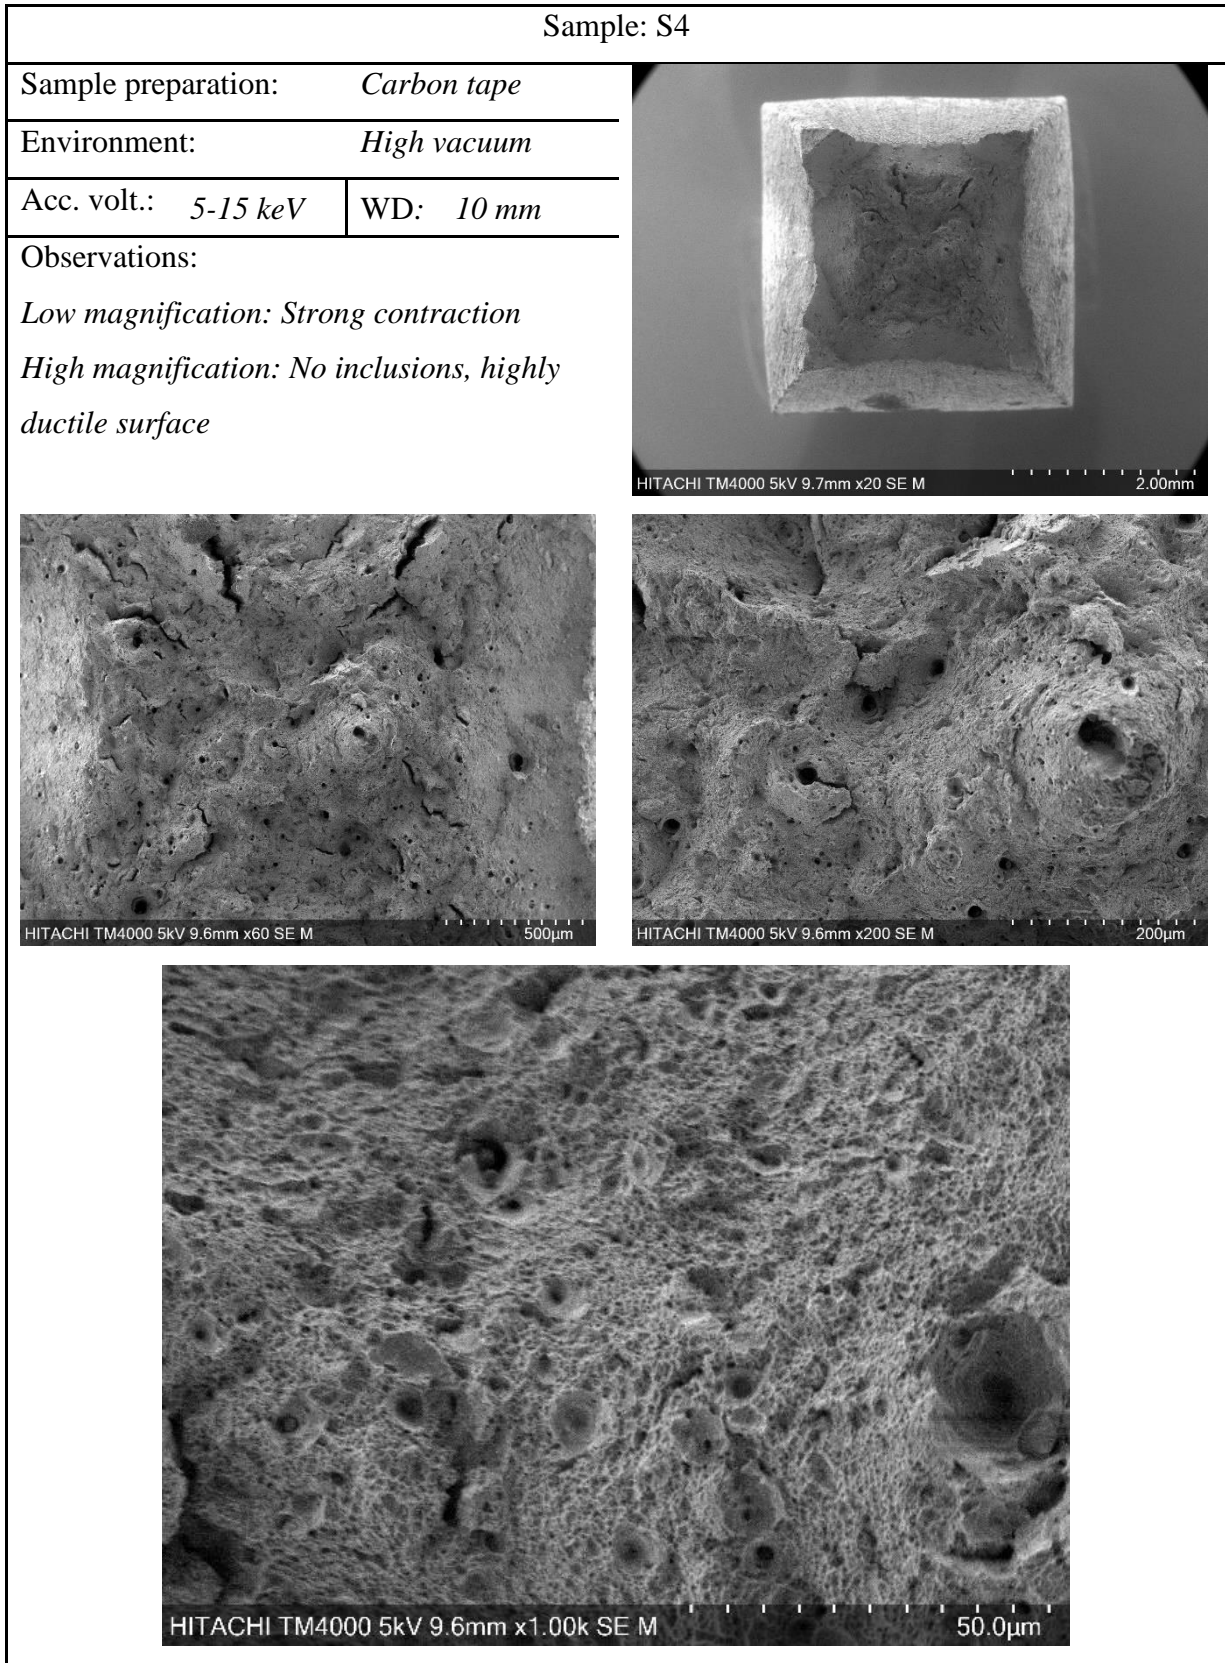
S4 test specimen fracture surface electron microscopic images
